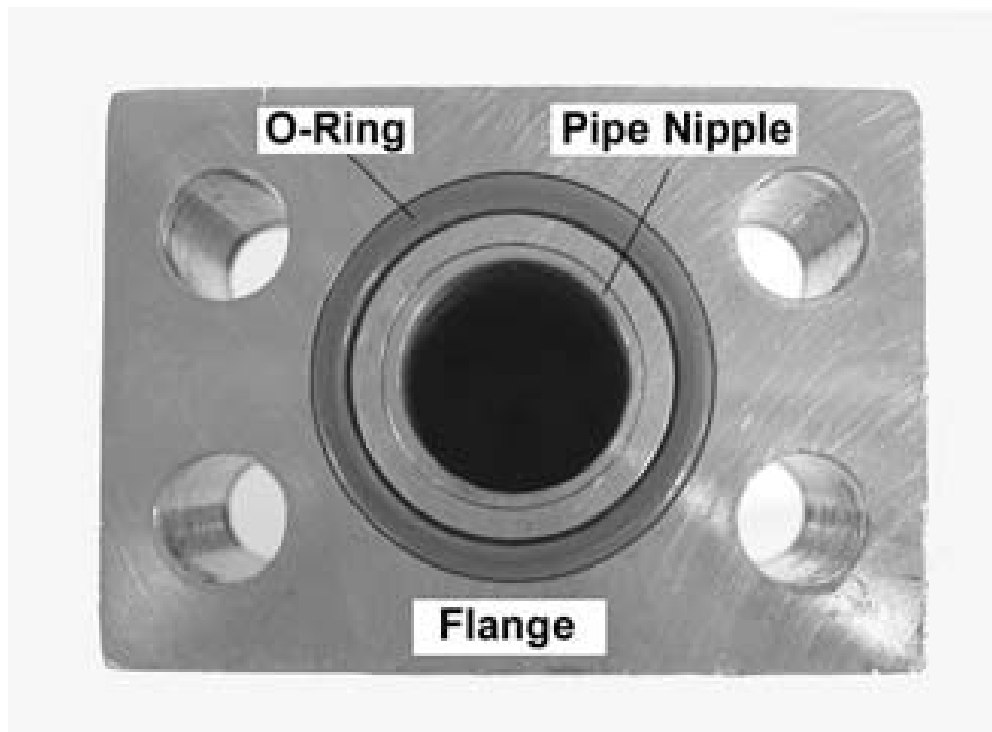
Photograph of Test Section (Mincks 2002)
